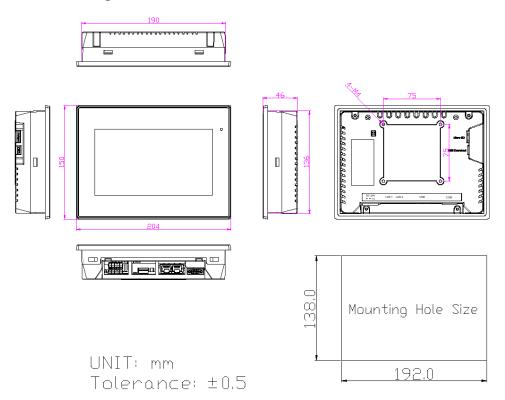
ARMPAC-6XXA Series VESA Mounting
